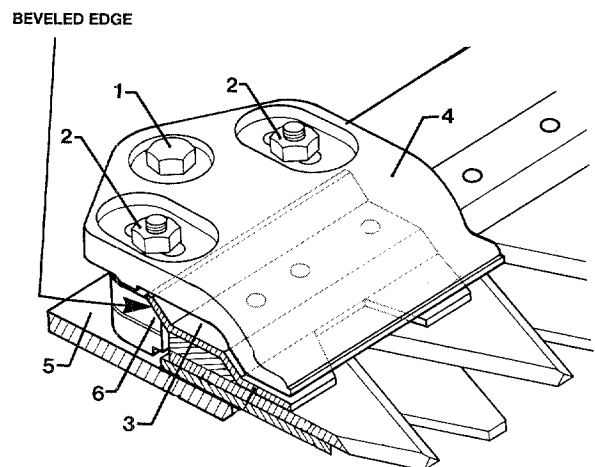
Side view of the adjustable cutter bar blade guide.
